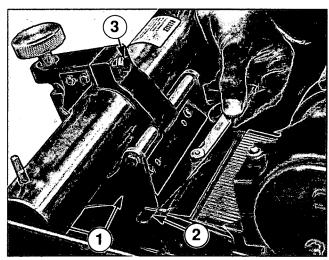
Setting chip guard clearance. (1) Chip Guard, (2) Feeler Gauge, (3) Pinch Bolt.
